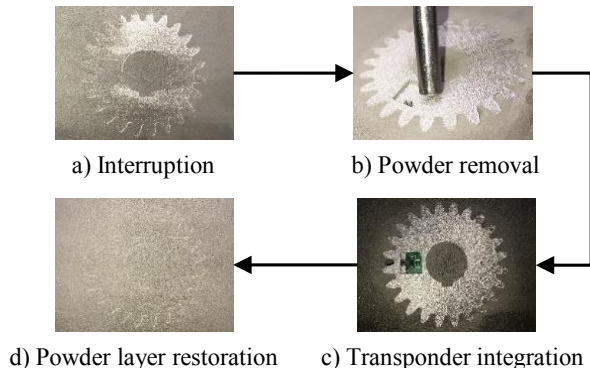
Step-by-step procedure for integrating the PCB when the PBF-LB/M build process was interrupted.
